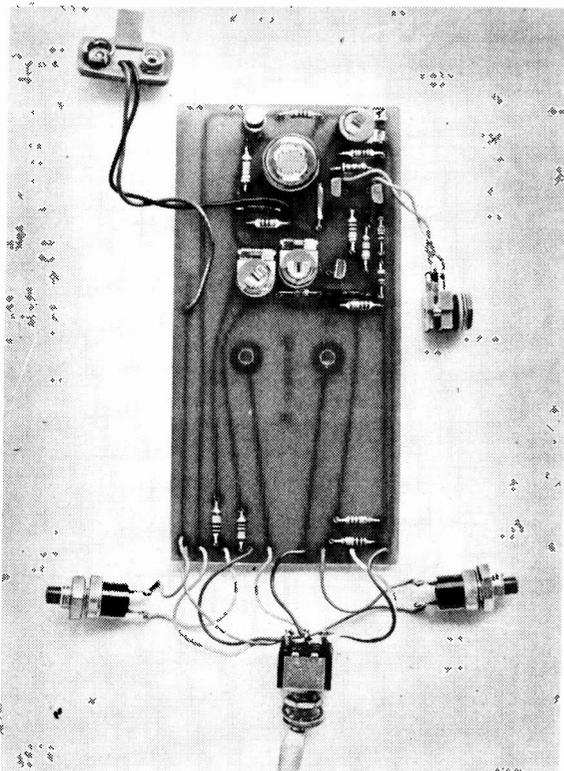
Constructional details of the complete unit. The ITT meter has screw terminals which the printed circuit board is designed to fit. The probe is an old felt pen body
